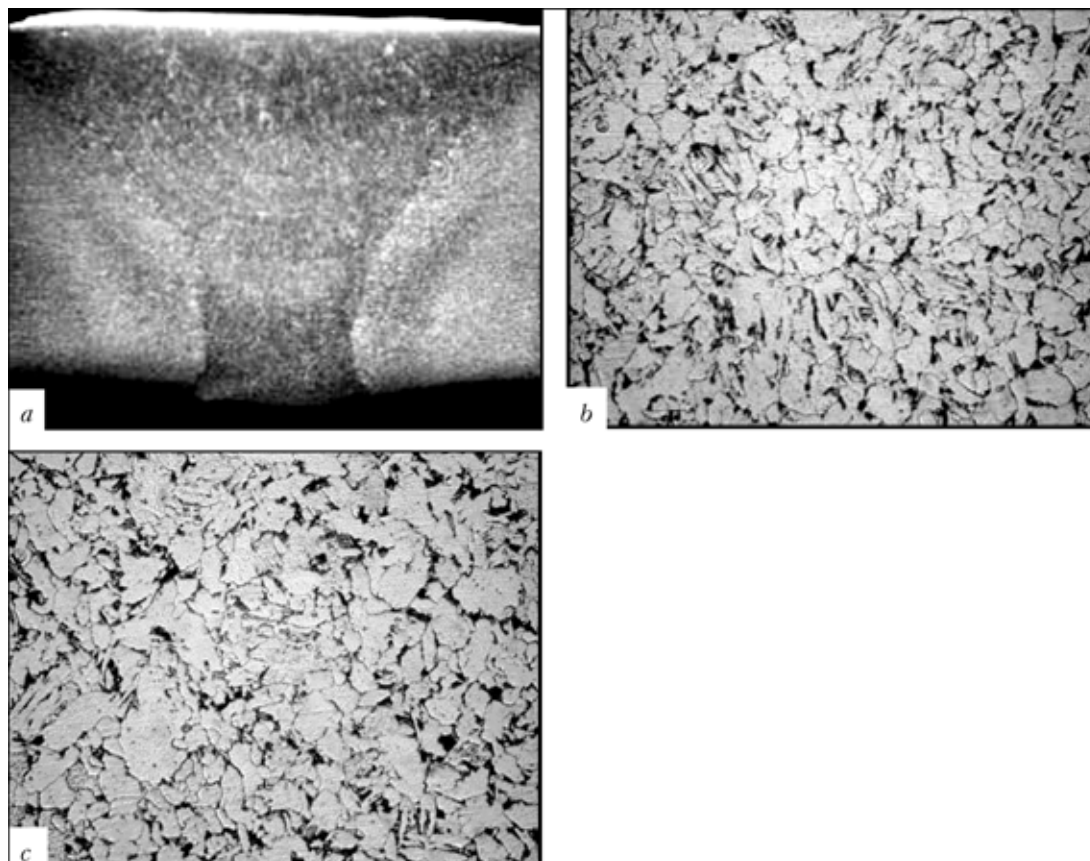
Macrosection (a) of welded joint in steel 10G2FByu (welding was performed with the VD-306DK unit and the PDGO-511 feeding mechanism; the root pass was made using the 1.2 mm wire Sv-08G2S, and filling and facing layers were deposited using 1.7 mm wire NR-207); b --- microstructure of the root pass weld metal ($\times 500$); c — microstructure of the HAZ metal (overheated region) ($\times 550$)
